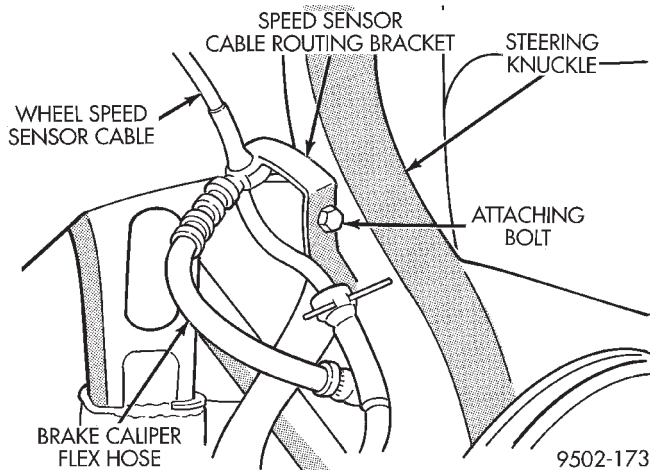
Wheel Speed Sensor Cable Routing Bracket
